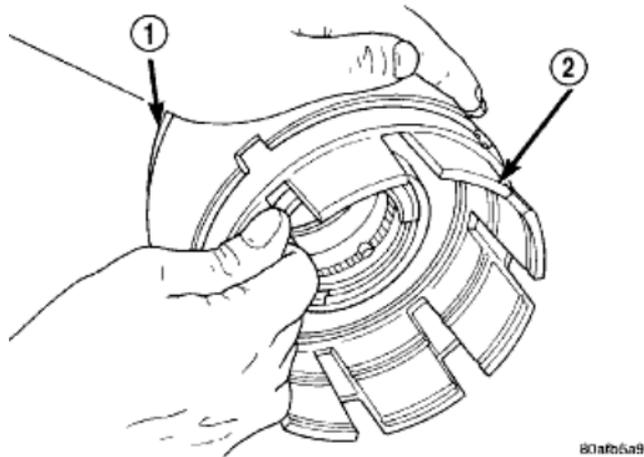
Identifying Clutch Retainer & OD/Reverse Piston
